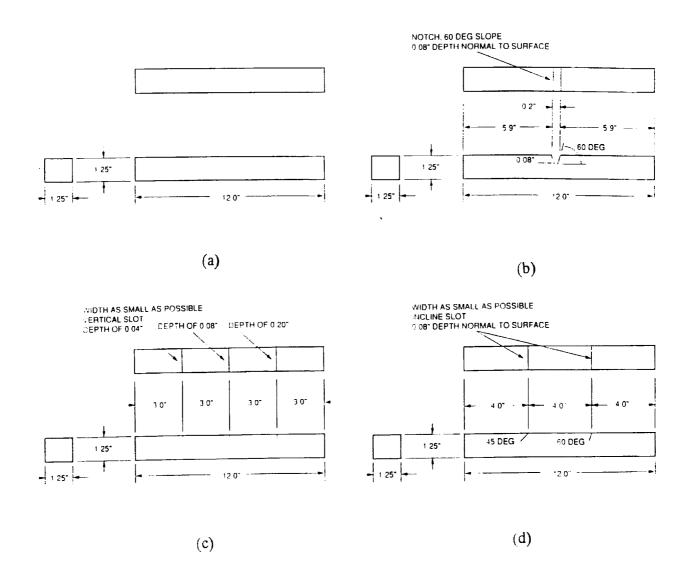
Aluminum samples machined for the project: (a) unflawed reference standard; (b) 60° notch; (c) straight cracks; (d) slanted cracks.
